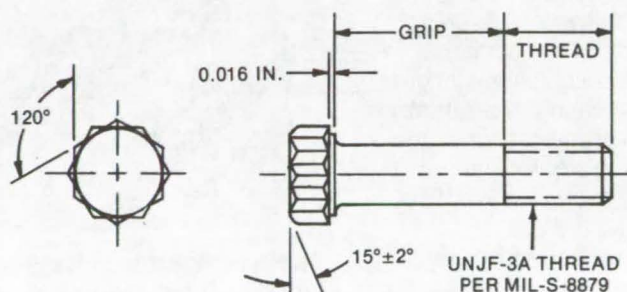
Modified Bolt Design depicts cold-formed head of up to 1-1/4 in. in diameter having a tensile strength of 220,000 psi.
